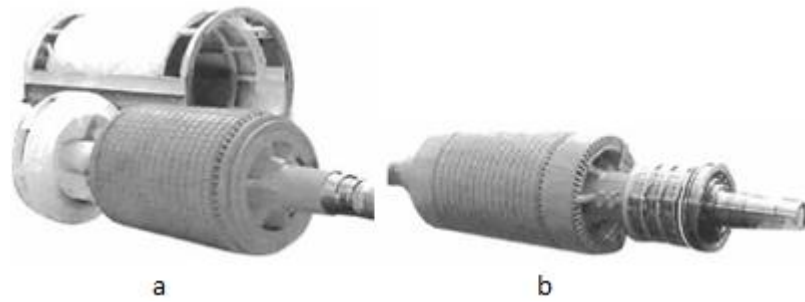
a - squirrel-cage rotor; b - wound rotor [6]
